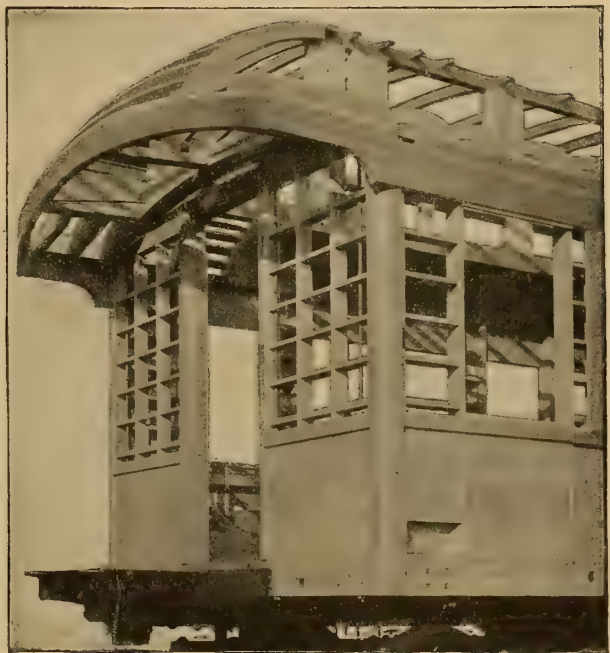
CORNER VIEW, SHOWING HOOD, END AND SIDE FRAMING.
